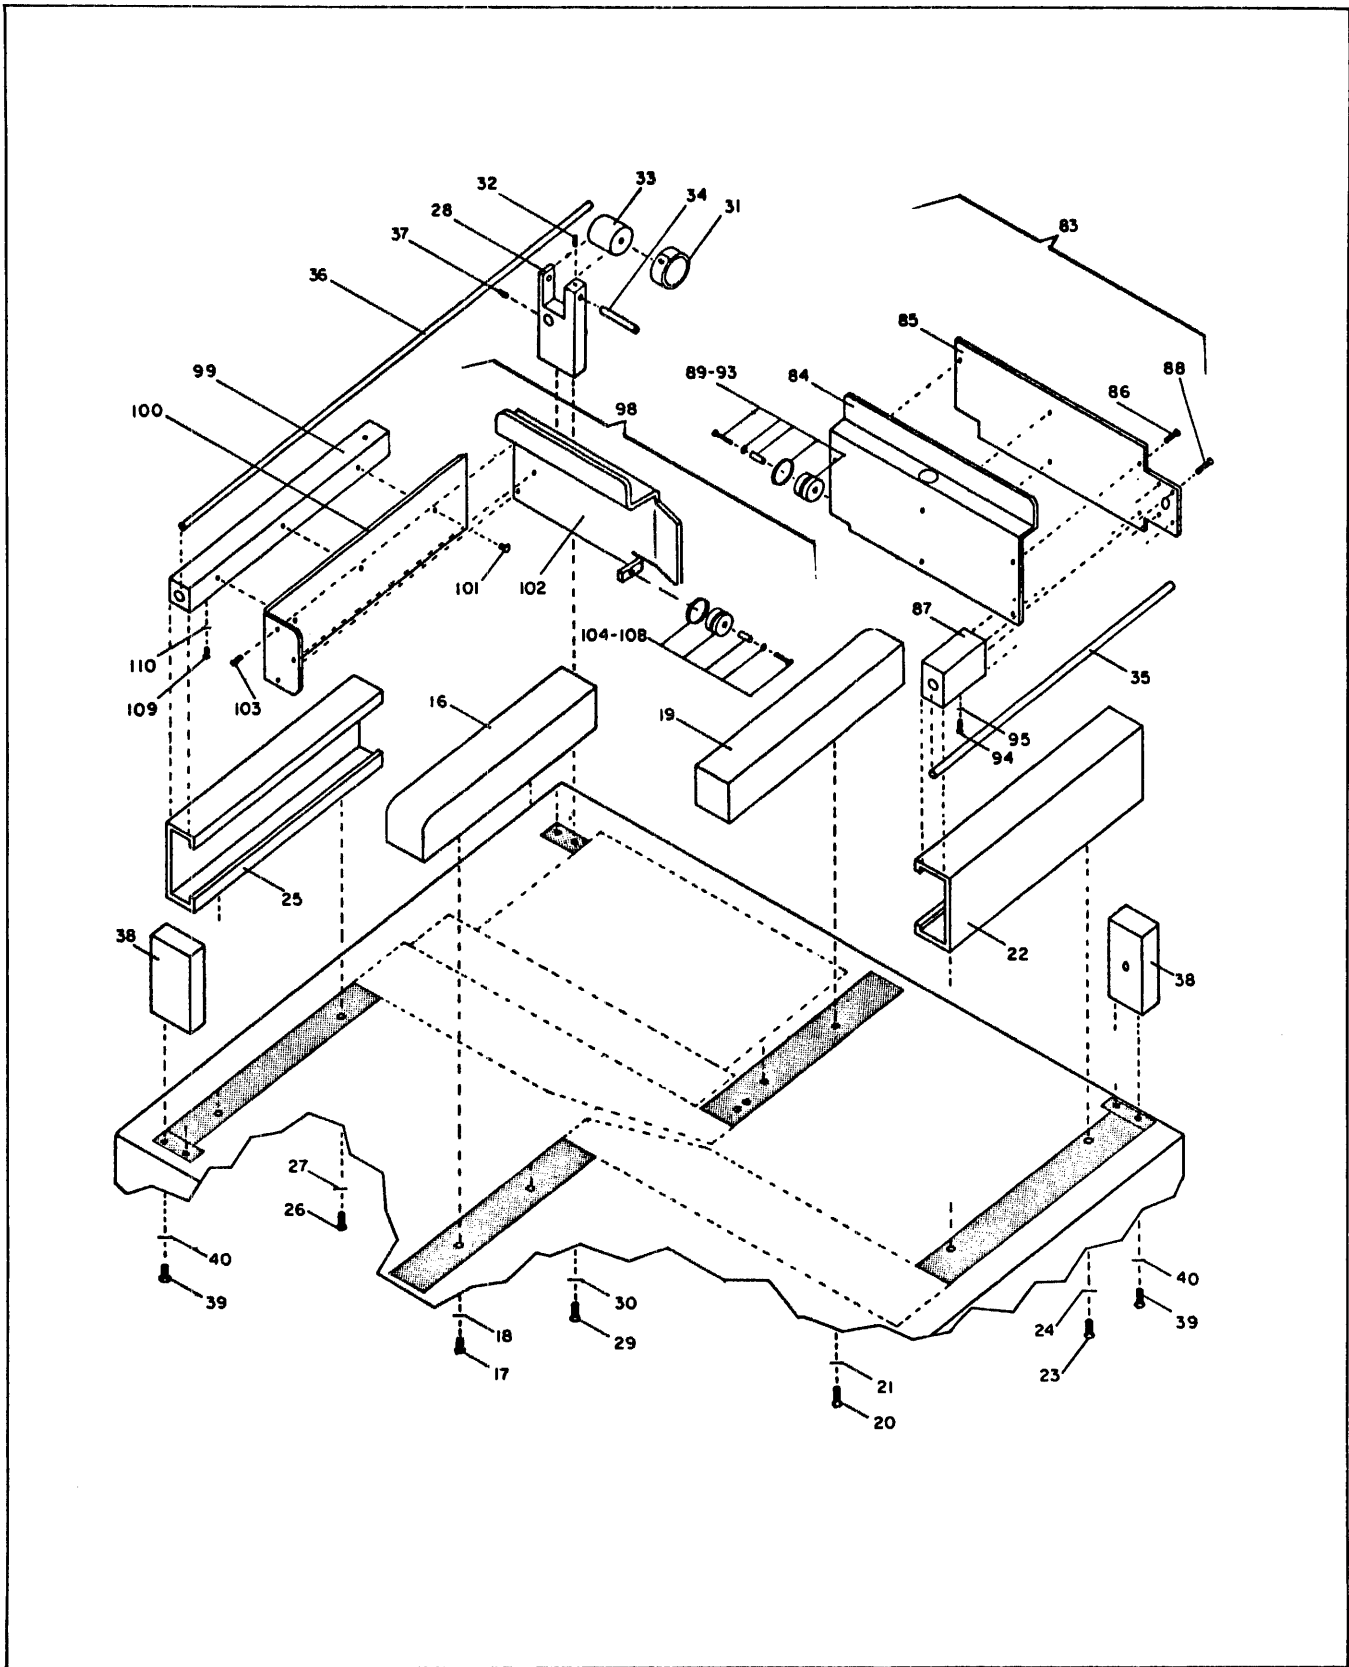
MAIN FRAME ASSEMBLY (sheet 2 of 3)
